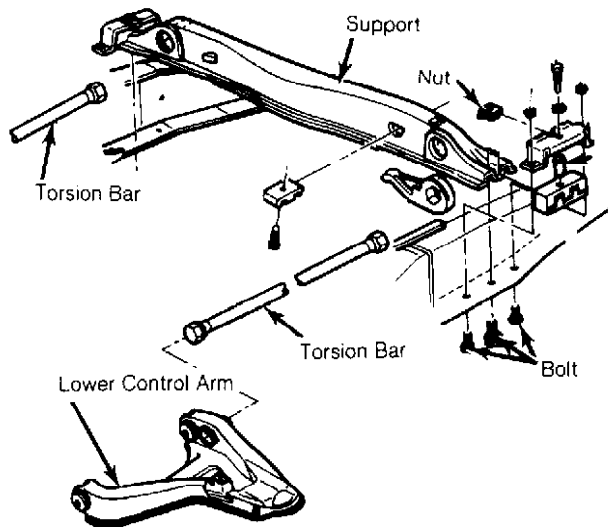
Exploded View Of Torsion Bar & Support Assembly
